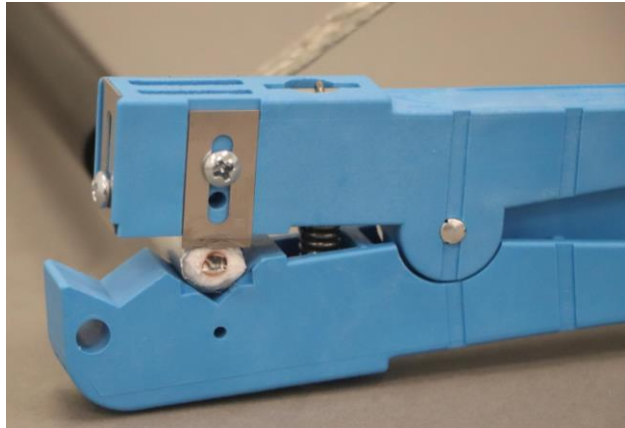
Setting the second adjustable blade ringer to a safe cutting depth
